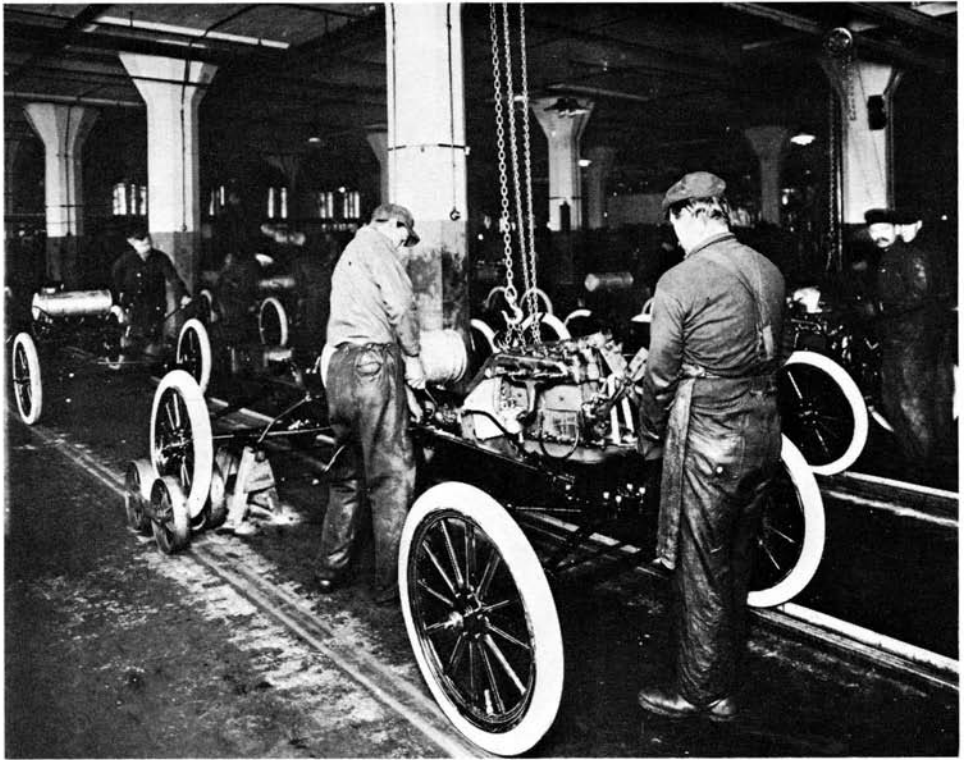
Engine Drop, Final Assembly Line, Highland Park, 1913. Careful study of this photograph suggests that at least three assembly lines were in operation and that chassis were still being pushed by hand along a single track with the aid of dollies. (Henry Ford Museum, The Edison Institute. Neg. No. 833-198.)
